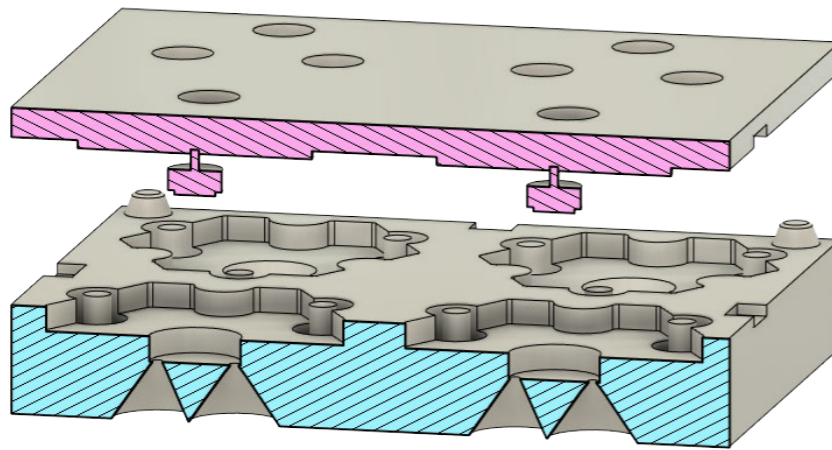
c) Mold design of magnetic soft actuator blocks along with inlet and outlet. (Appendix D.4)
